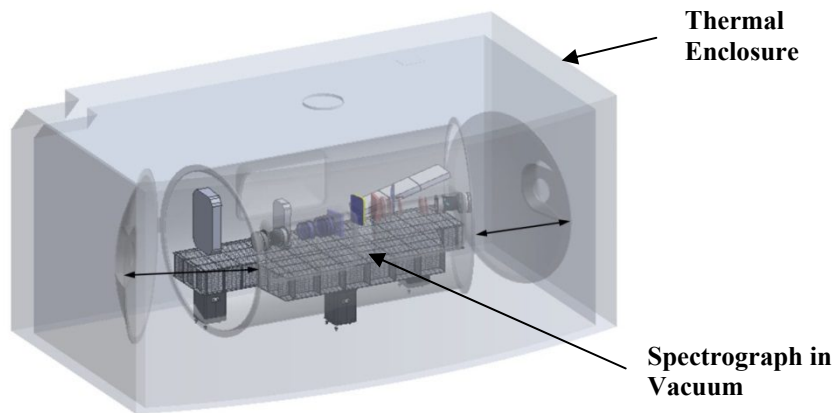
Tubular Vacuum Chamber Concept (Shown Inside Thermal Enclosure)
